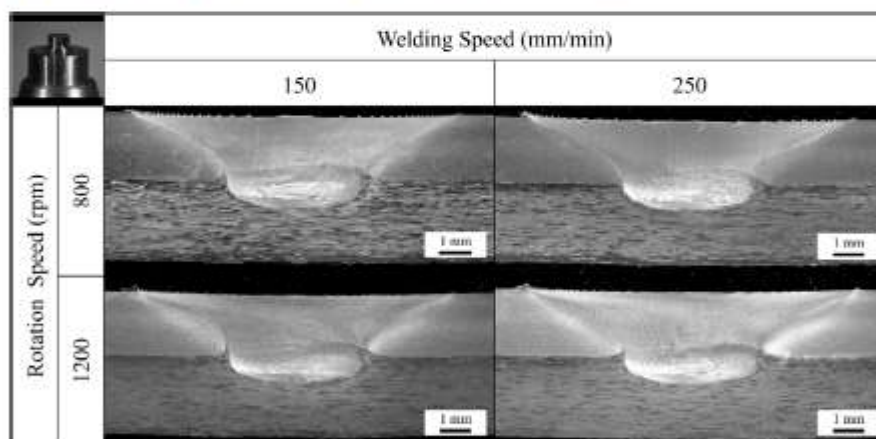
Transverse macro-sections of the friction stir welding (FSW) lap joints performed with the 3 flats + mixed thread tool. The advancing side is located at the left of the image for all macro-sections. Tool translation movement was forward from the shown cross-section.
